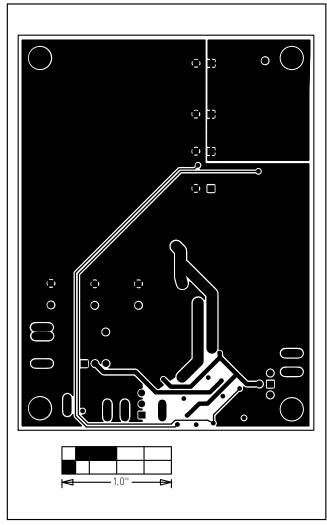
MAX8554 EV Kit PC Board Layout—Solder Side
